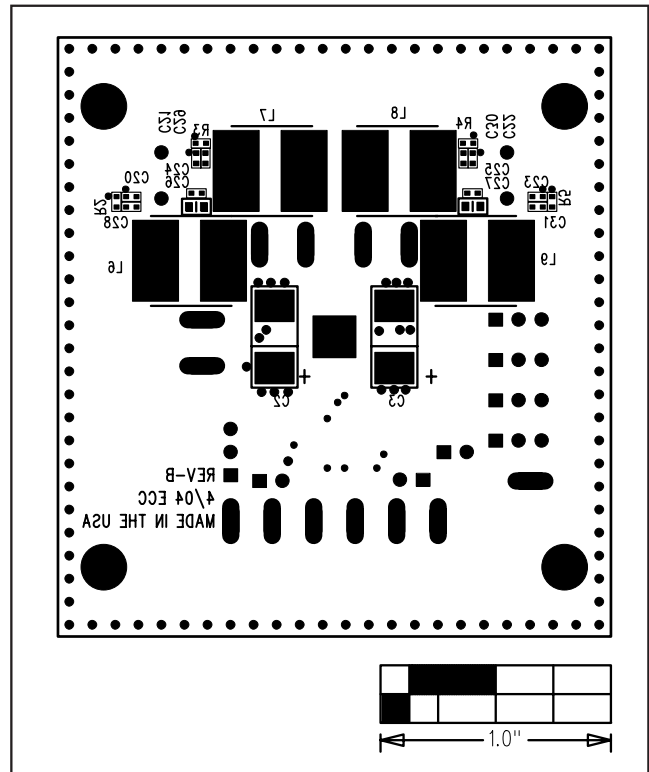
MAX9714 EV Kit Component Placement Guide—Solder Side
